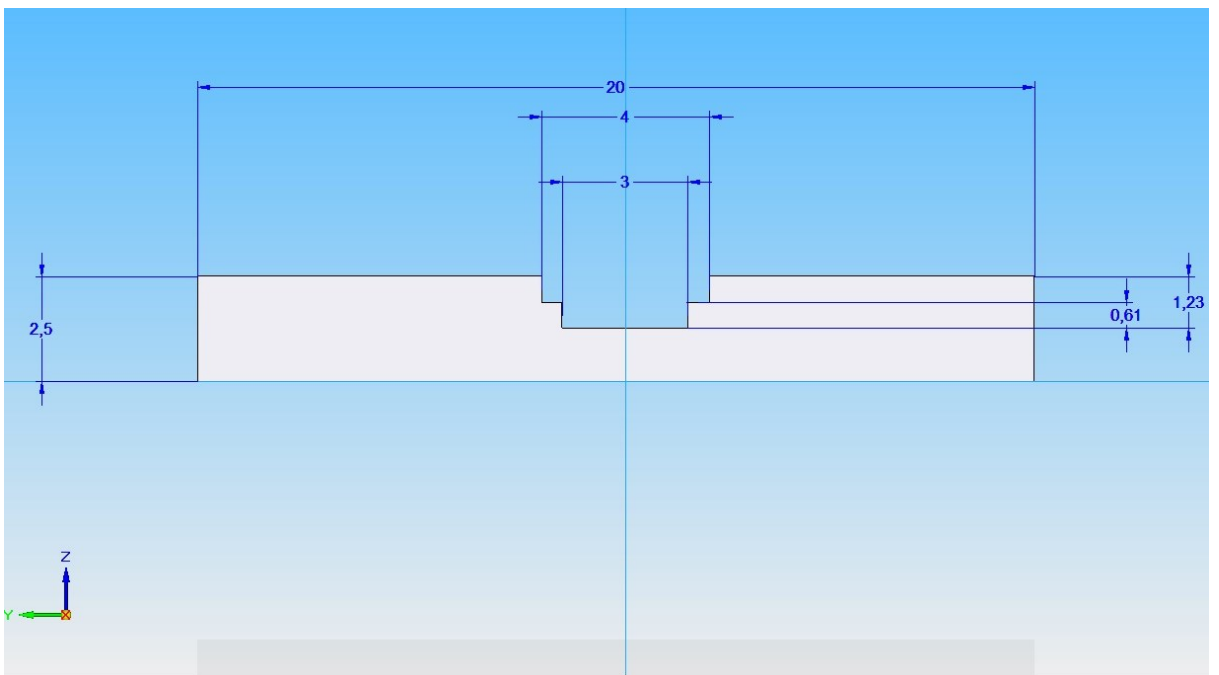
2 Back view of waveguide sensor carrier (Part 1)
